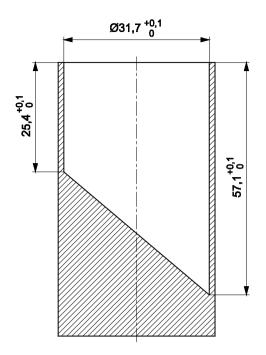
Small parts cylinder iTeh STANDARD PREVIEW
